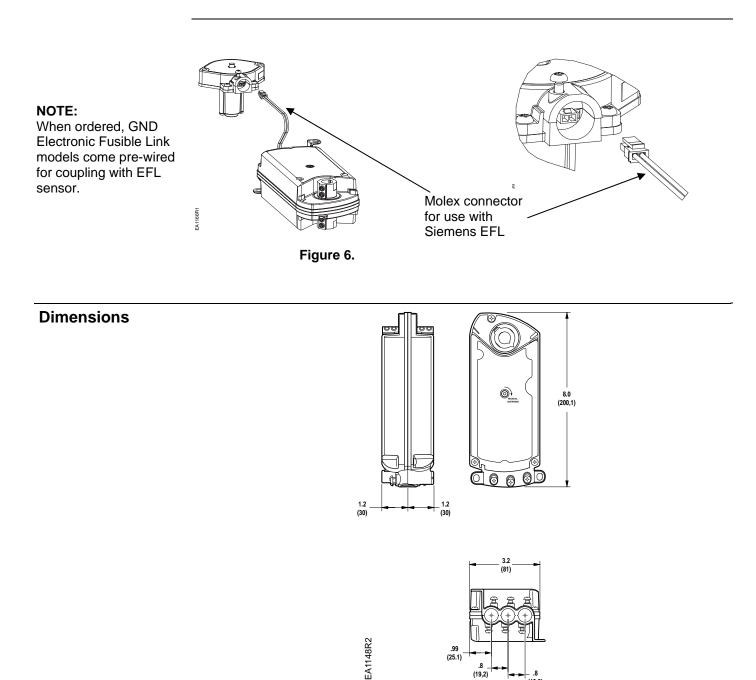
Dimensions of OpenAir GND Actuator in Inches (Millimeters).
